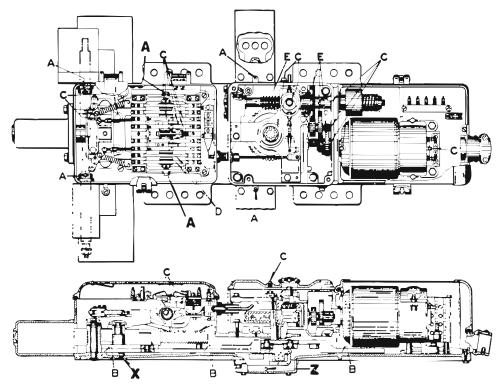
Lubrication Locations for M-3 Switch Machine
